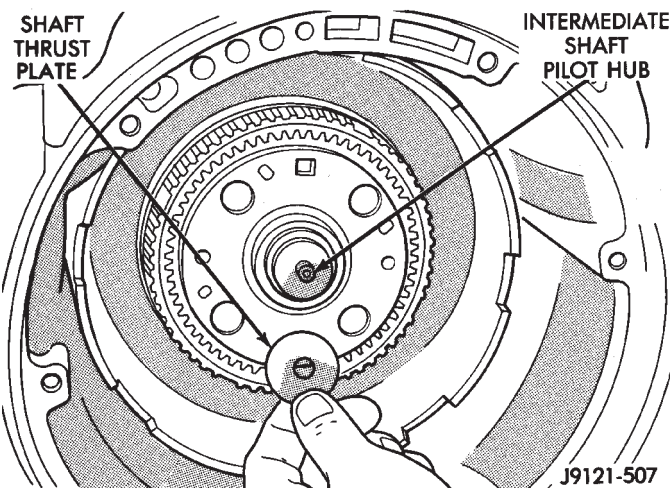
Removing Intermediate Shaft Thrust Plate—46RH
